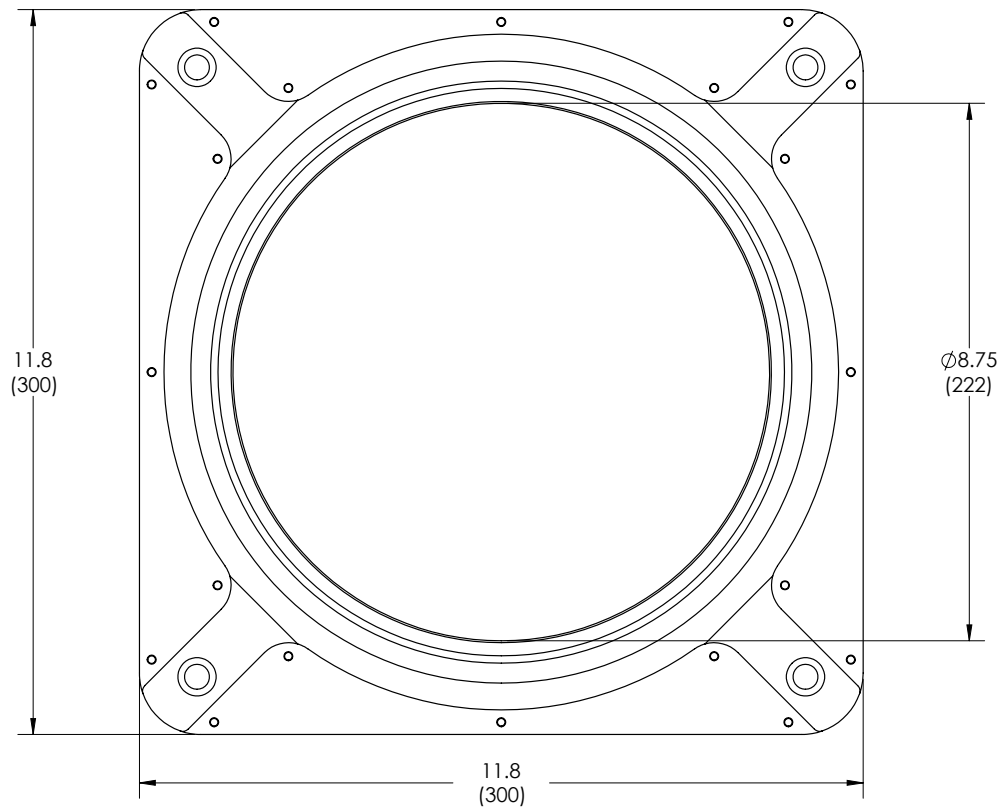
Overall dimensions, footprint. Shown without isolator feet. Turbopump inlet port not shown.
